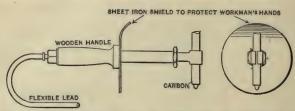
Carbon Rod mounted on Handle, with Protecting Shield for Use in "Arc Process" of working Metals.
